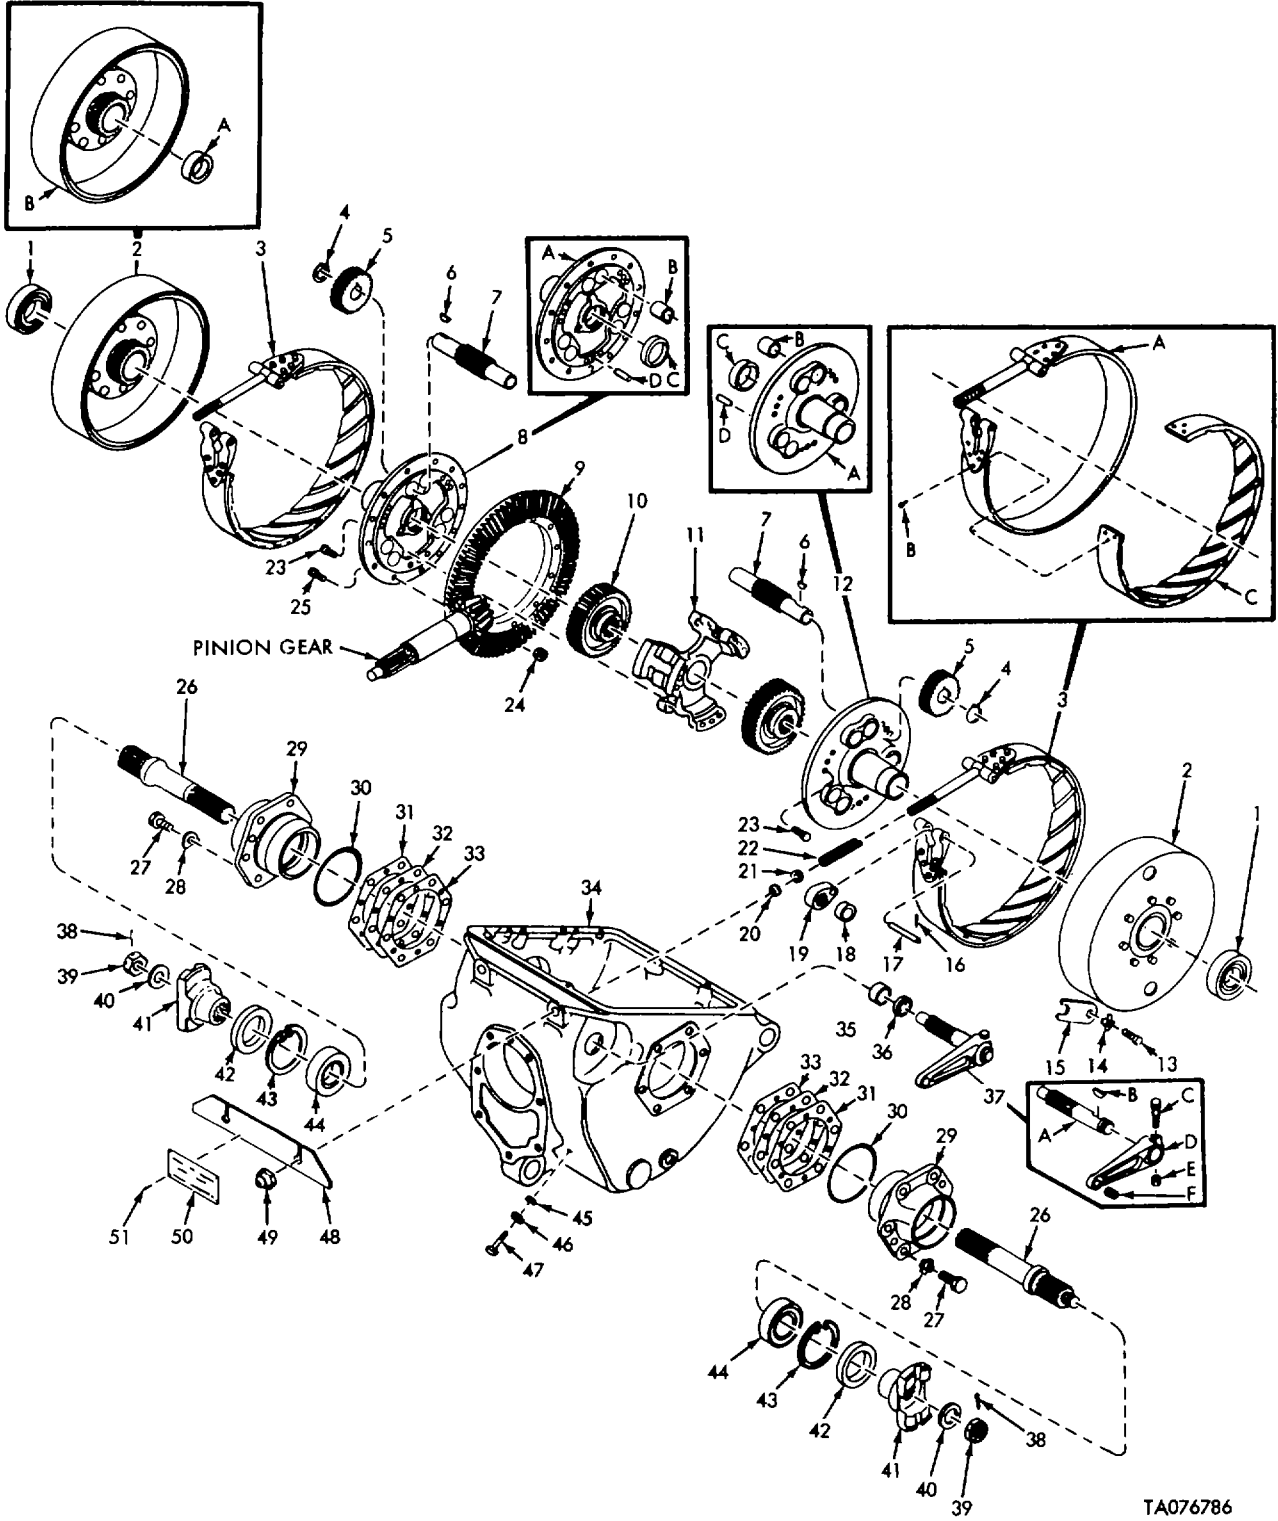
Differential Internal Disassembly (Sheet 1 of 2)
